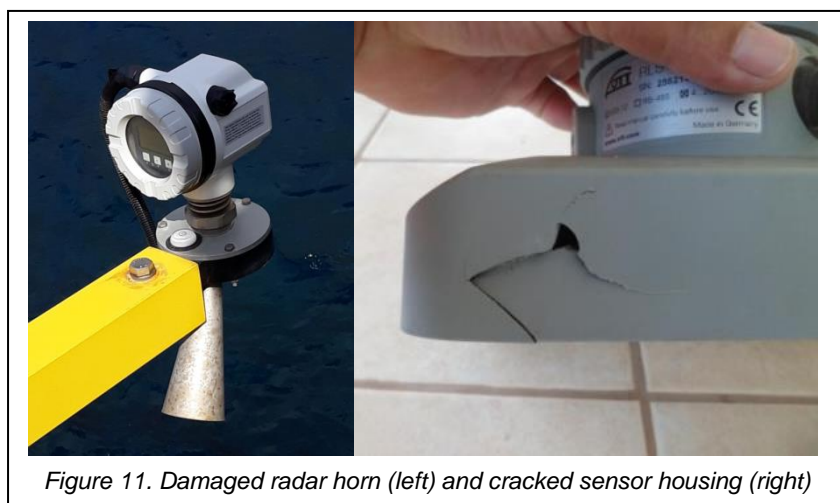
Damaged radar horn (left) and cracked sensor housing (right)
